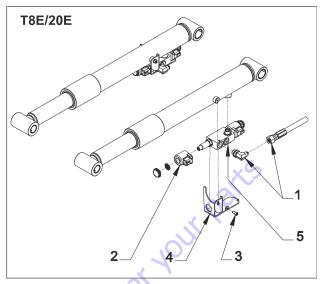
Mast Cylinder Holding Valve - Schematic/ Exploded View
